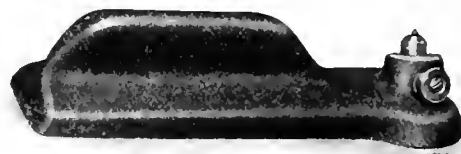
Tool for Truing, which permits Adjustment of Carbon to present Fresh Cutting Edges
